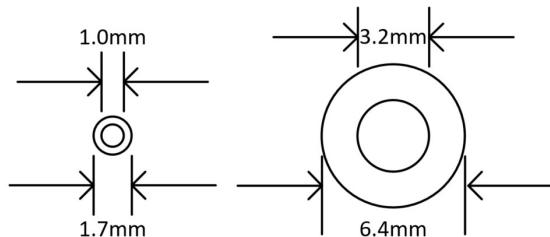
Dimensions of tie-point (left) and corner mounting hole (right).
